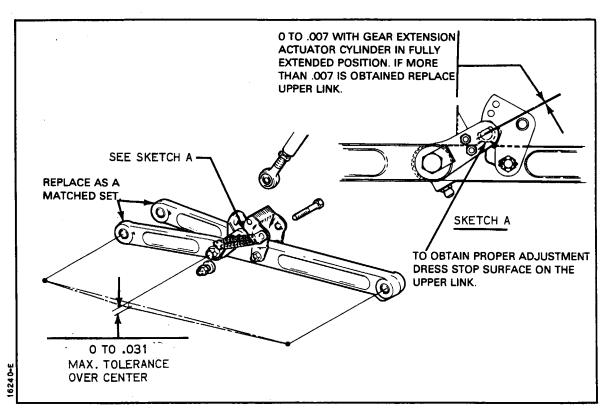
Adjustment of Main Gear Drag Link and Latch Assembly
